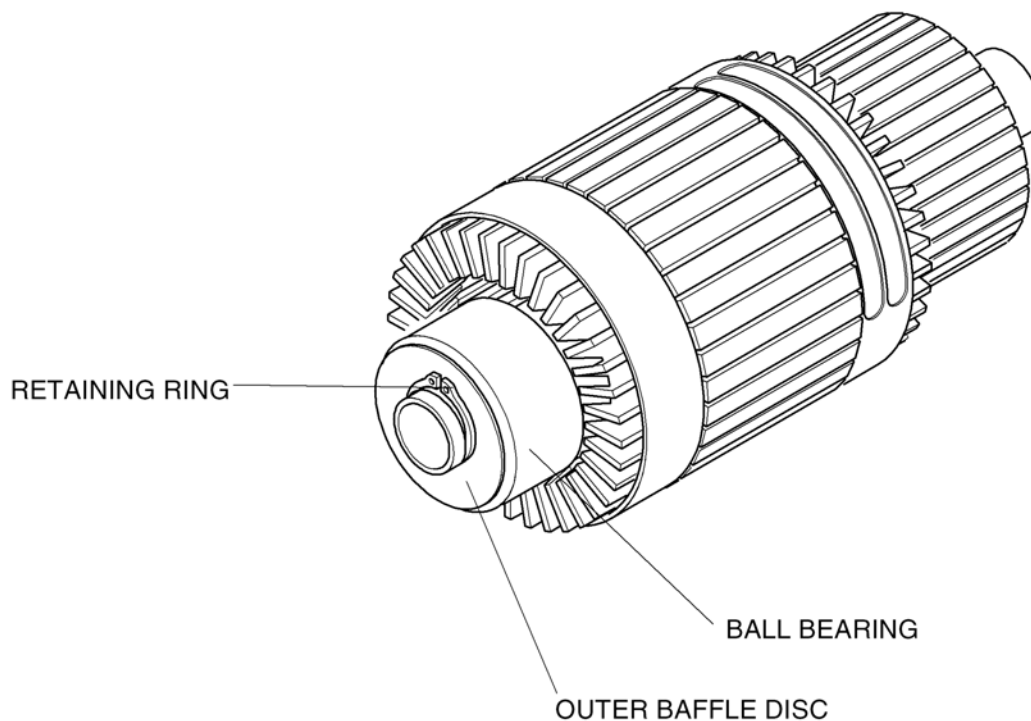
Installing Outer Baffle Disc and Retaining Ring
